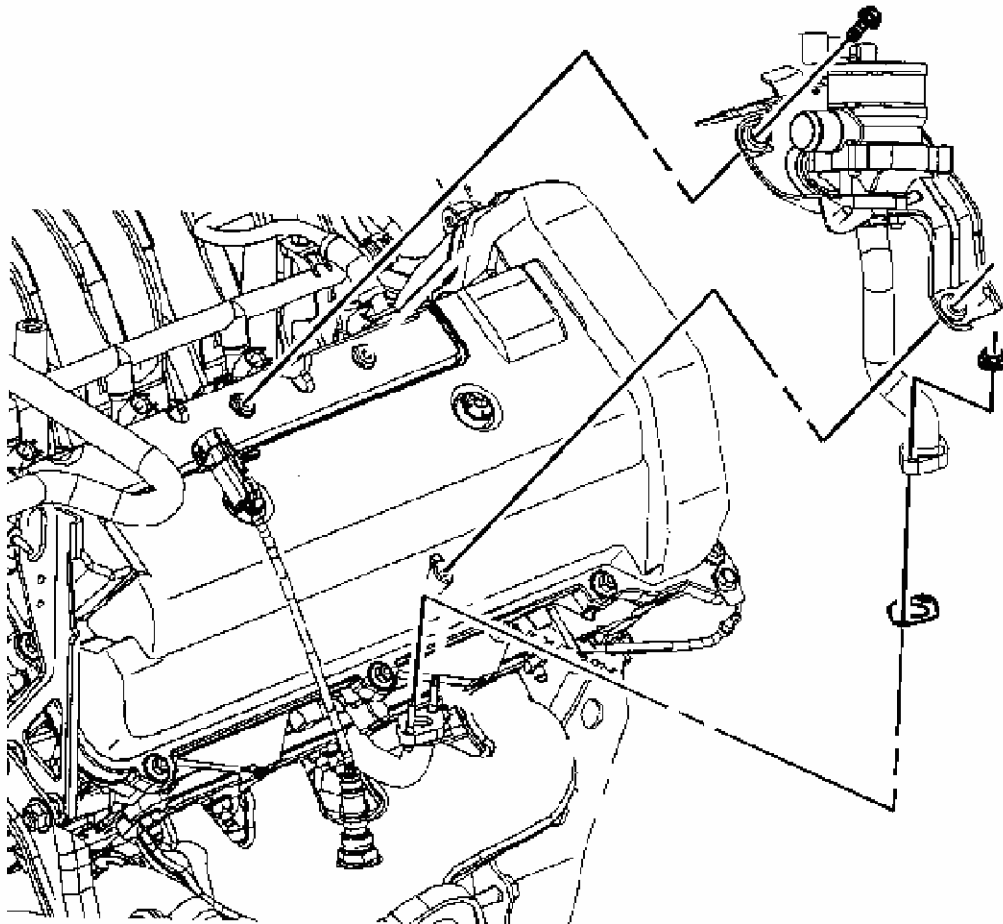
Identifying Secondary Air Injection Valve Pipe Nuts
